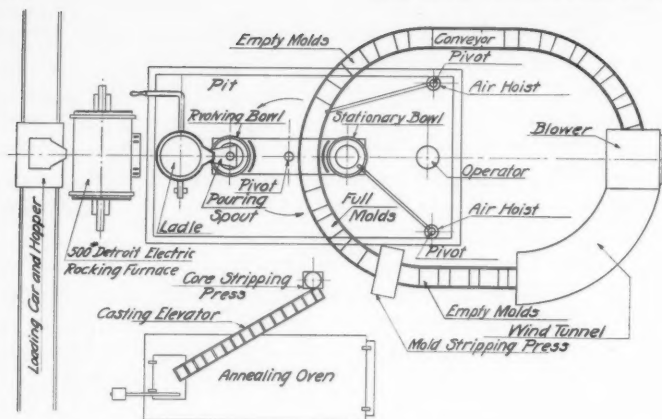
GENERAL LAYOUT OF FOUNDRY.
